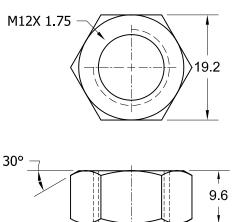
Orthographic views and dimensions of the M12X 1.75 nut
